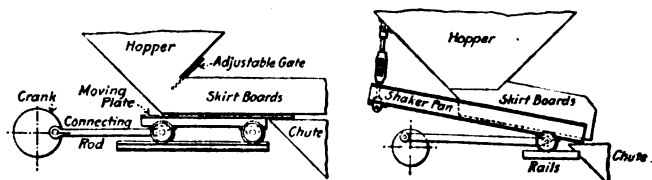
Reciprocating Plate Feeder. FIG. 80.—Shaking Feeder.
